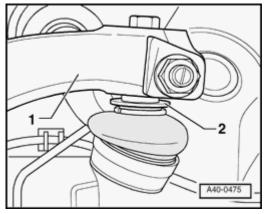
Identifying Steering Arm & Tie Rod Ball Joint Sealing Washer Courtesy of VOLKSWAGEN UNITED STATES, INC.
